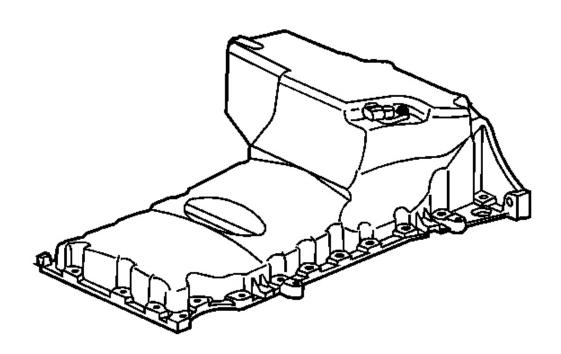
Inspecting Oil Pan Courtesy of GENERAL MOTORS CORP.
